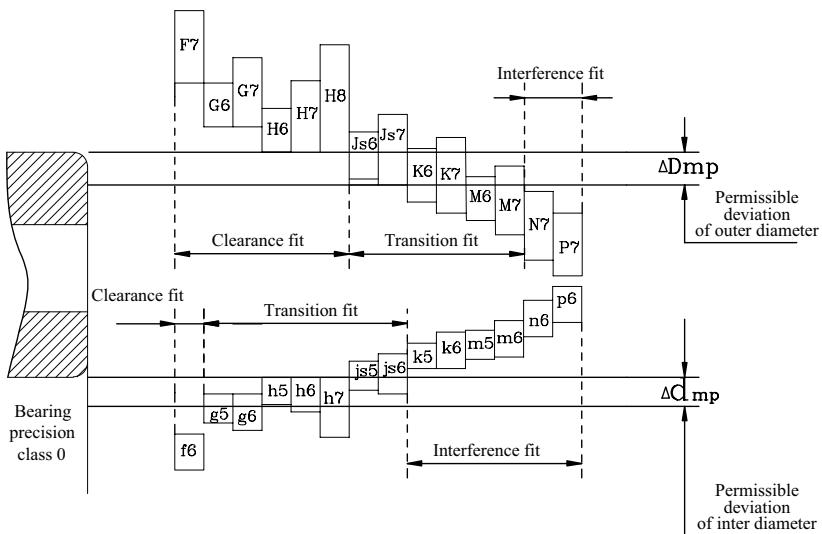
Correlations between dimension tolerance for shaft/housing bore and fitting
